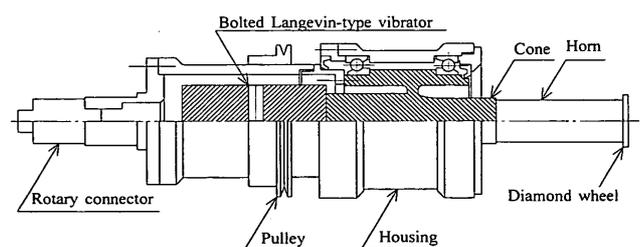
Torsional ultrasonic vibration spindle for on-machine tool shaping
